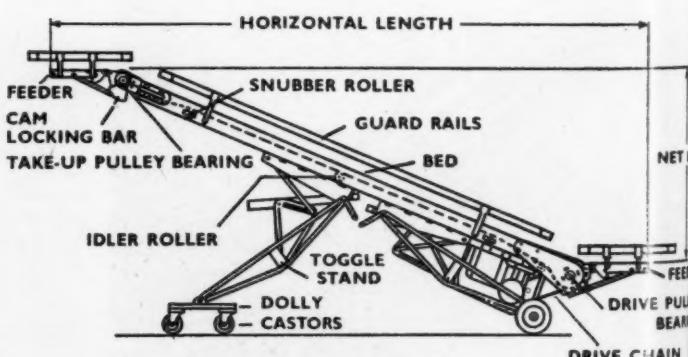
Layout of Rapistan Stevedore Junior mobile conveyor
